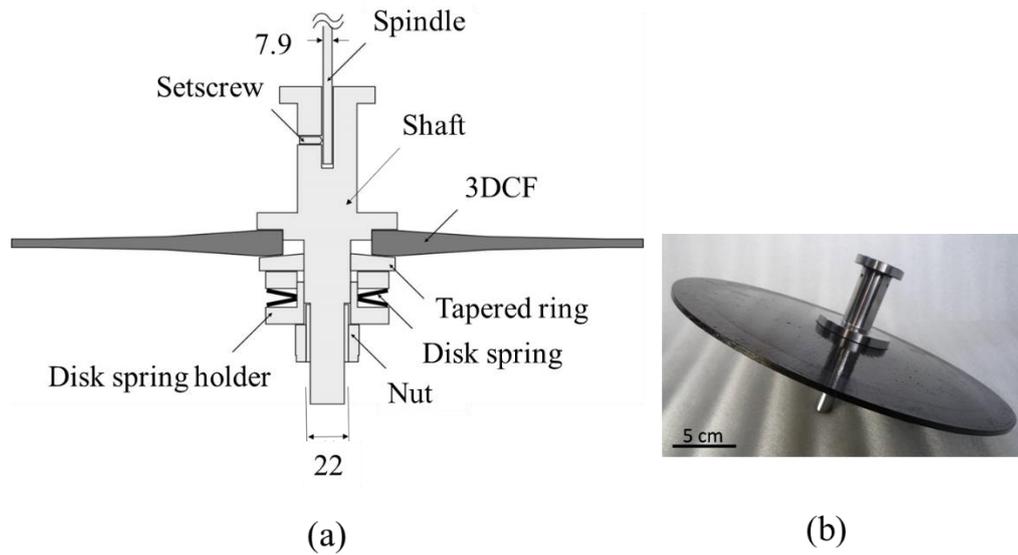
Test fixtures for type II spin test (Tapered coupling): (a) setting of the specimen and (b) outlook of the specimen with the fixture.
